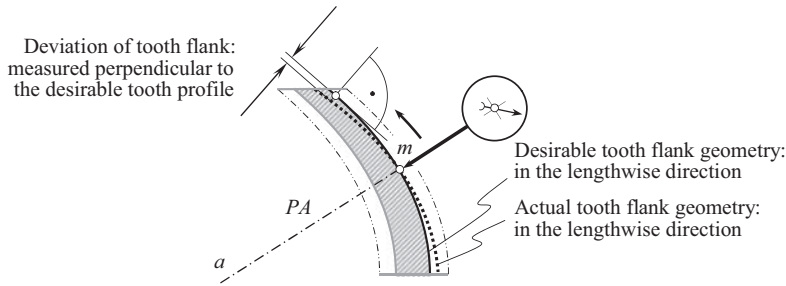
Inspection of accuracy in the lengthwise direction of a gear for intersected-axes gear pair.
